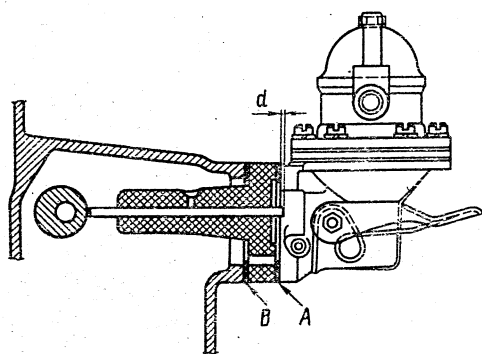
Diagram for Checking and Adjusting the Travel of Pump Drive Pushrod:
